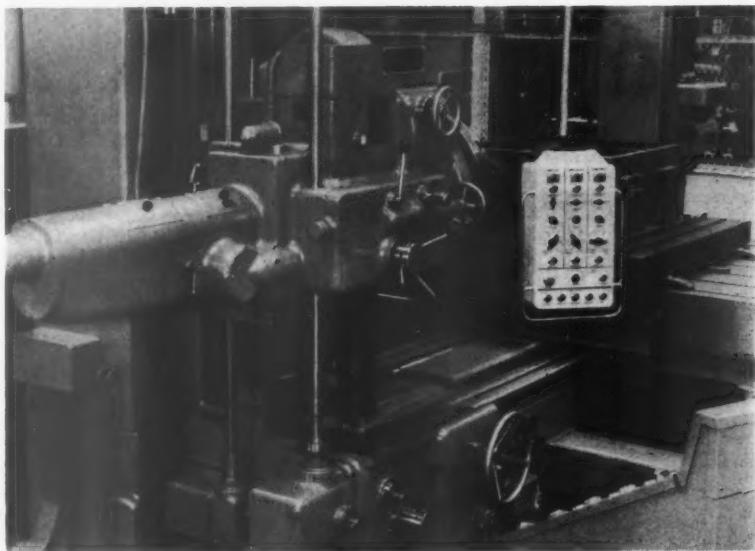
Close up of the spindle head of the No. 3 Kearns patent universal horizontal surfacing, boring and milling machine and to the right of the head the pendant control unit
